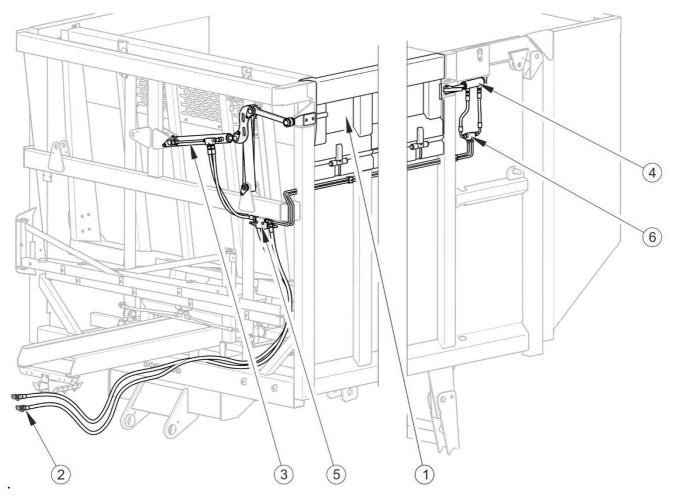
Design of the hydraulic system of the hinged wall
